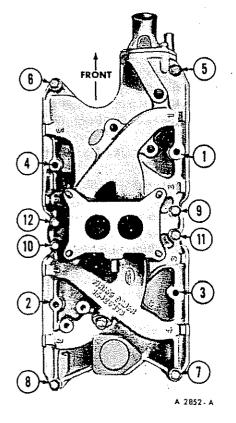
Intake Manifold Bolts Tightening Sequence—302 CID Engine
